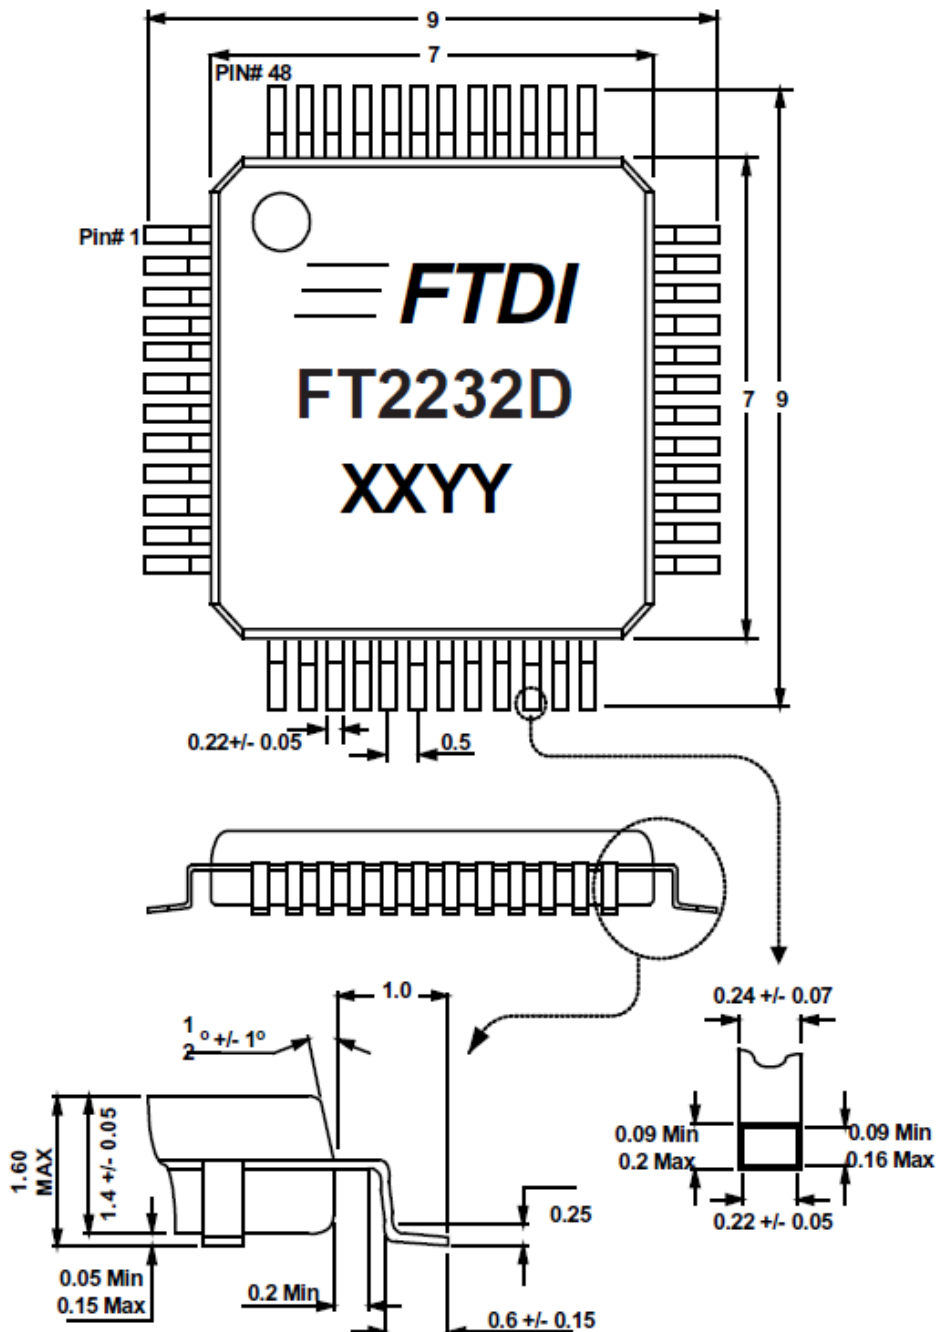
48LD Lead Free LQFP Package Dimensions
